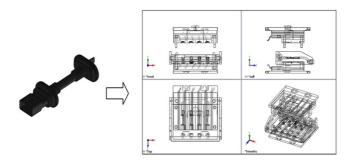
Grommet rubber part and its 2D CAD rubber mold design drawing.
